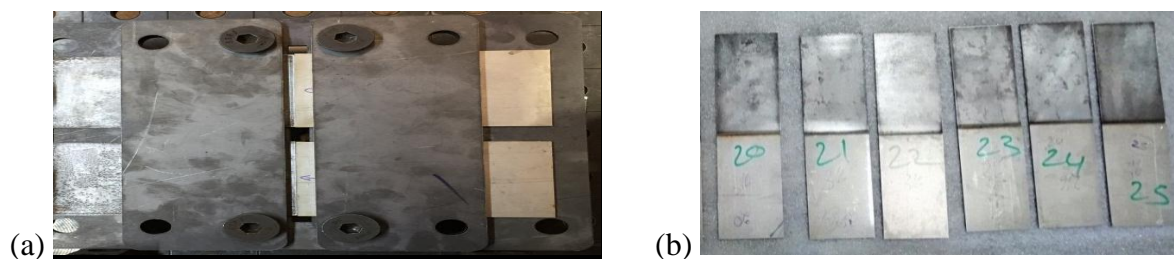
LBW work pieces: (a) position of work pieces (b) welded joints
